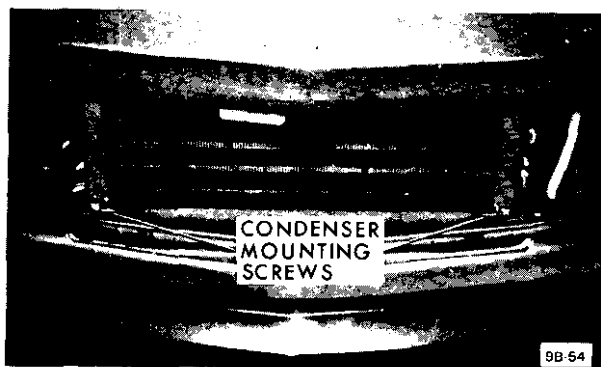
B-74 Condenser Assembly and Attachments. Opel 1900 - Manta
